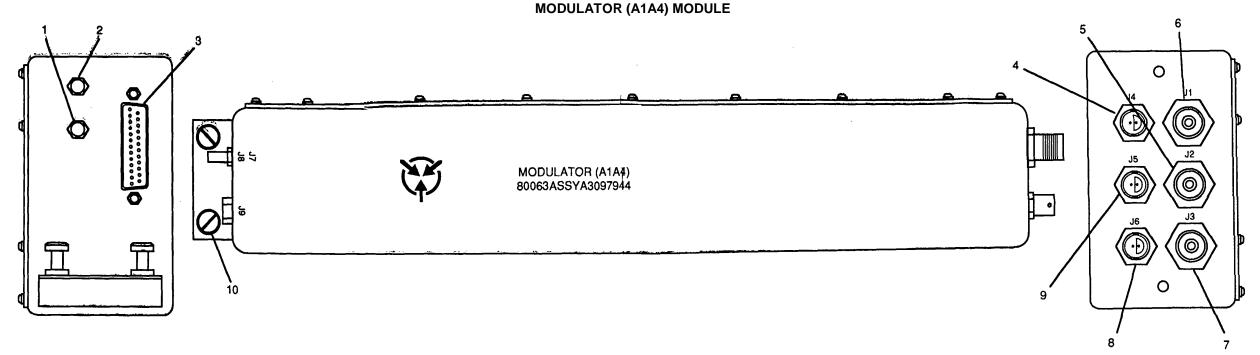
TS-4295/G Exploded View (Sheet 3 of 3)
